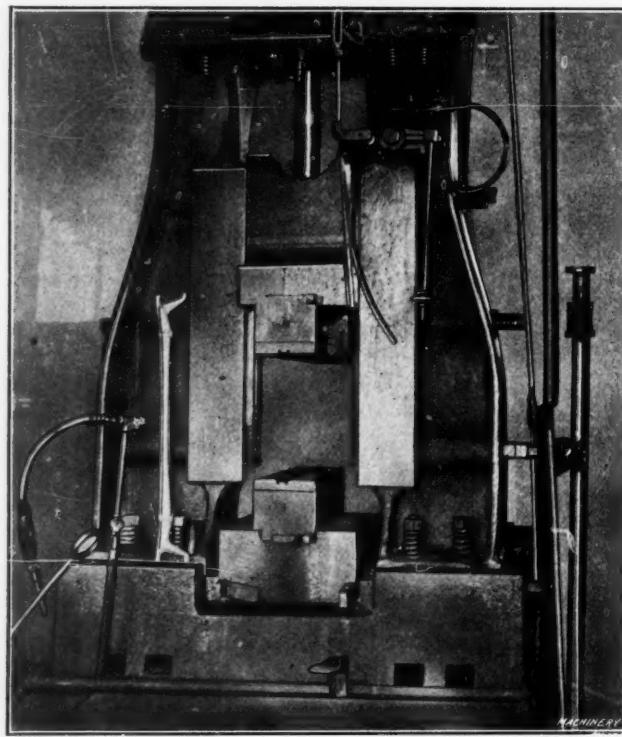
"Massillon" Steam Hammer used for bringing the Ford Front Axle to Final Shape
